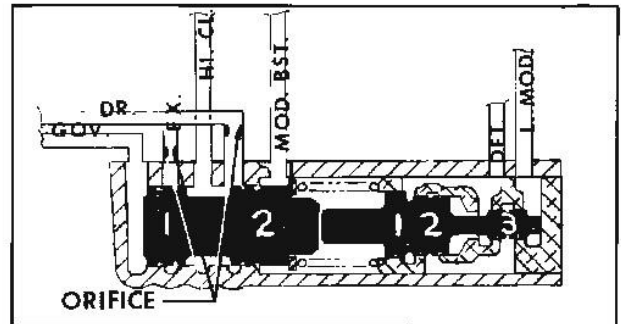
B-13 Shift Valve and Shift Control Valve - High
